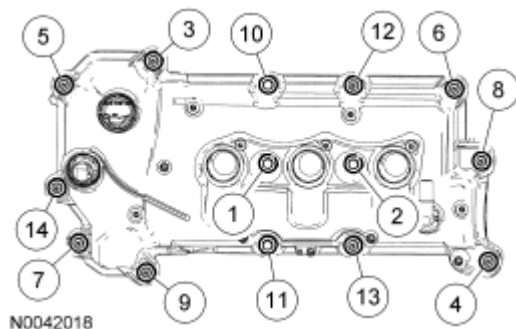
Identifying Tightening Sequence Of Valve Cover Bolts
